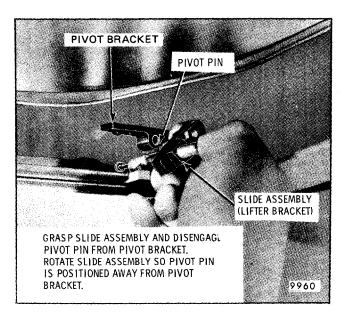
Rear Slide Assembly Disengaged - E and K Styles
